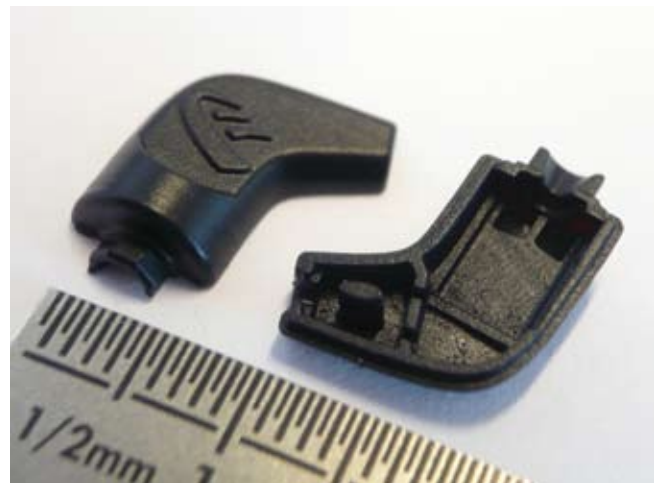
A miniature housing produced by rapid manufacturing without expensive tools.
